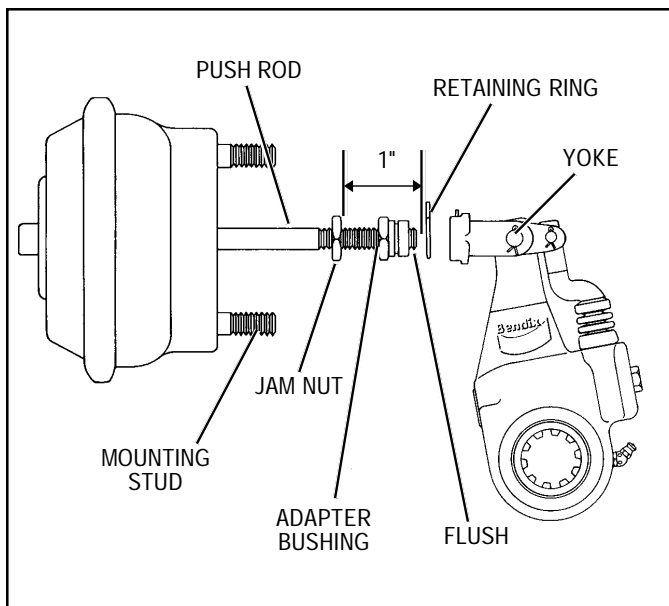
QUICK-CONNECT YOKE ASSEMBLY
